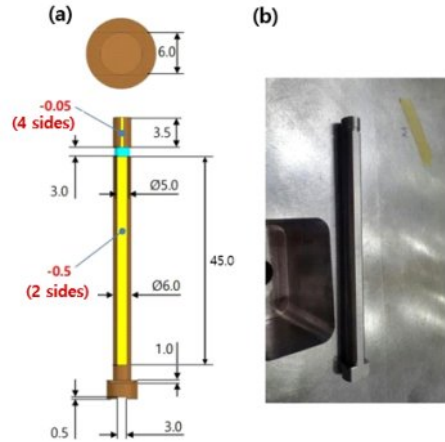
EGI core pin: (a) pin design, (b) machined pin
